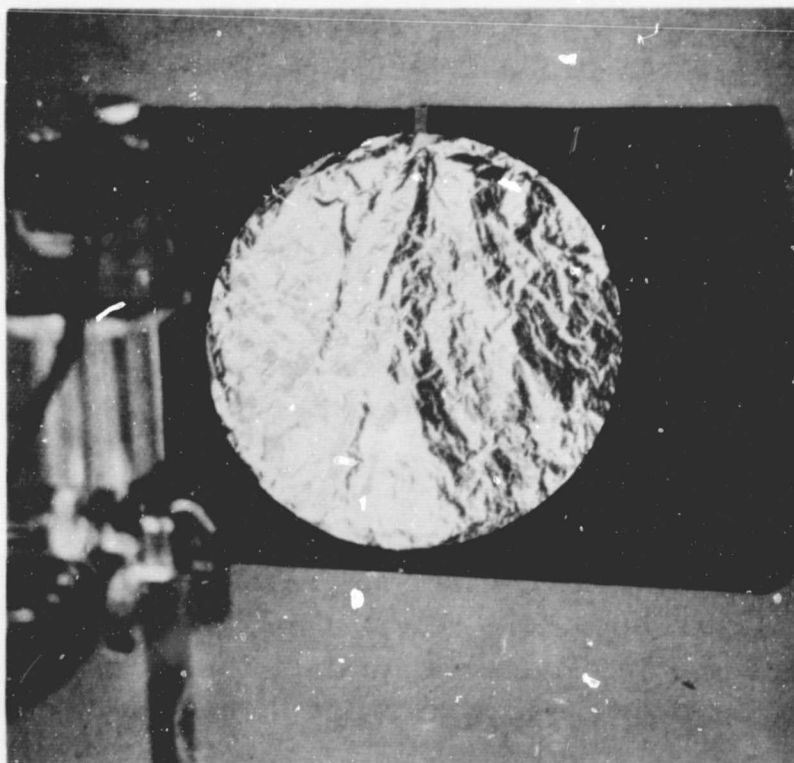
Platinum Insulation Assembly—Spray Coating the Bottom Planar Discs
